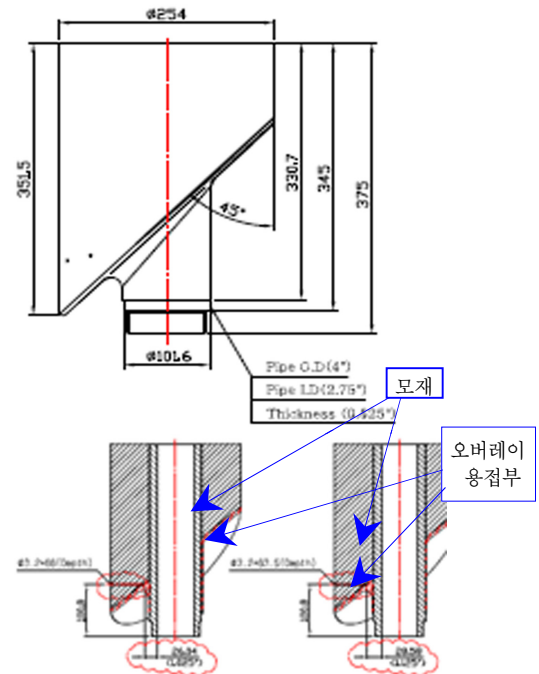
Design drawing of flawed overlay weld specimen
